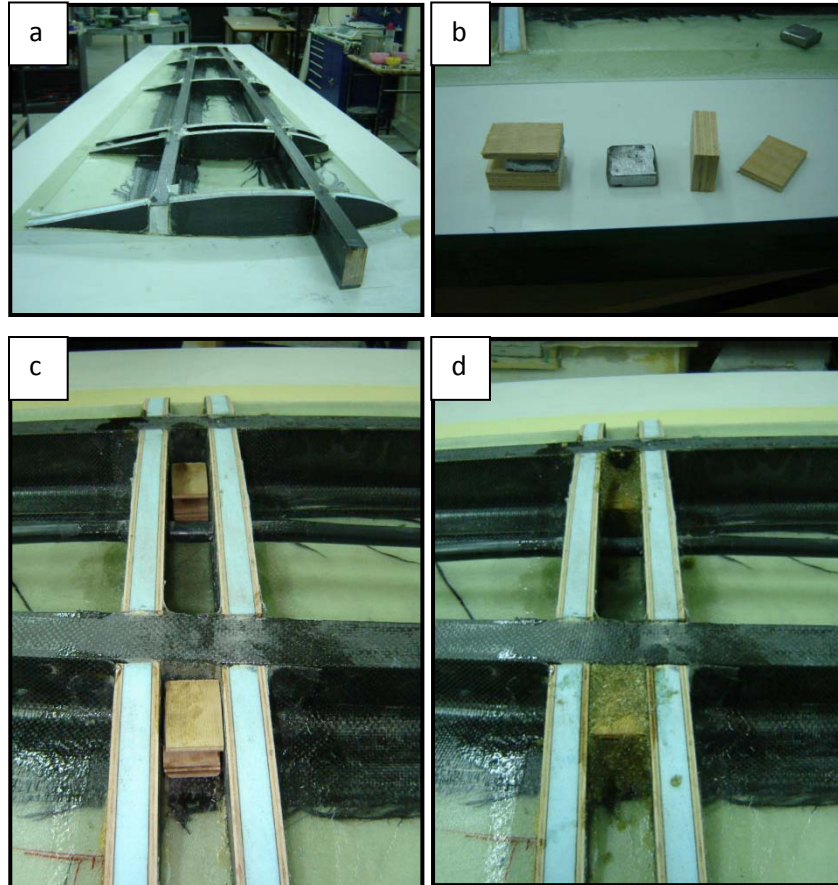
Two ribs in boom position (a), Sandwich structure for boom connection (b), Sandwich structures places (c) and adhered (d)
